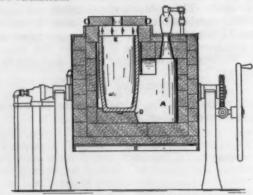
SINGLE COMBUSTION CHAMBER FURNACE.
